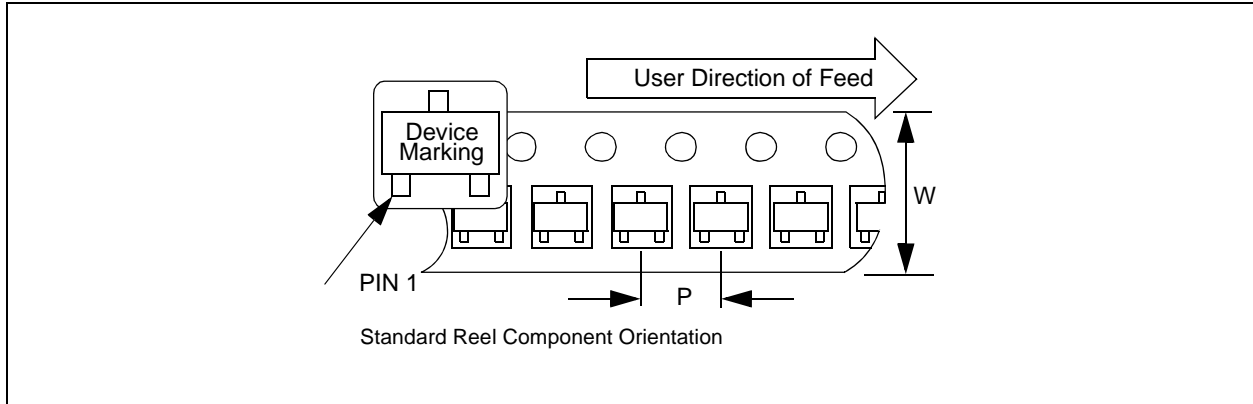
EMBOSSED CARRIER DIMENSIONS (8, 12, 16 AND 24 MM TAPE ONLY)
